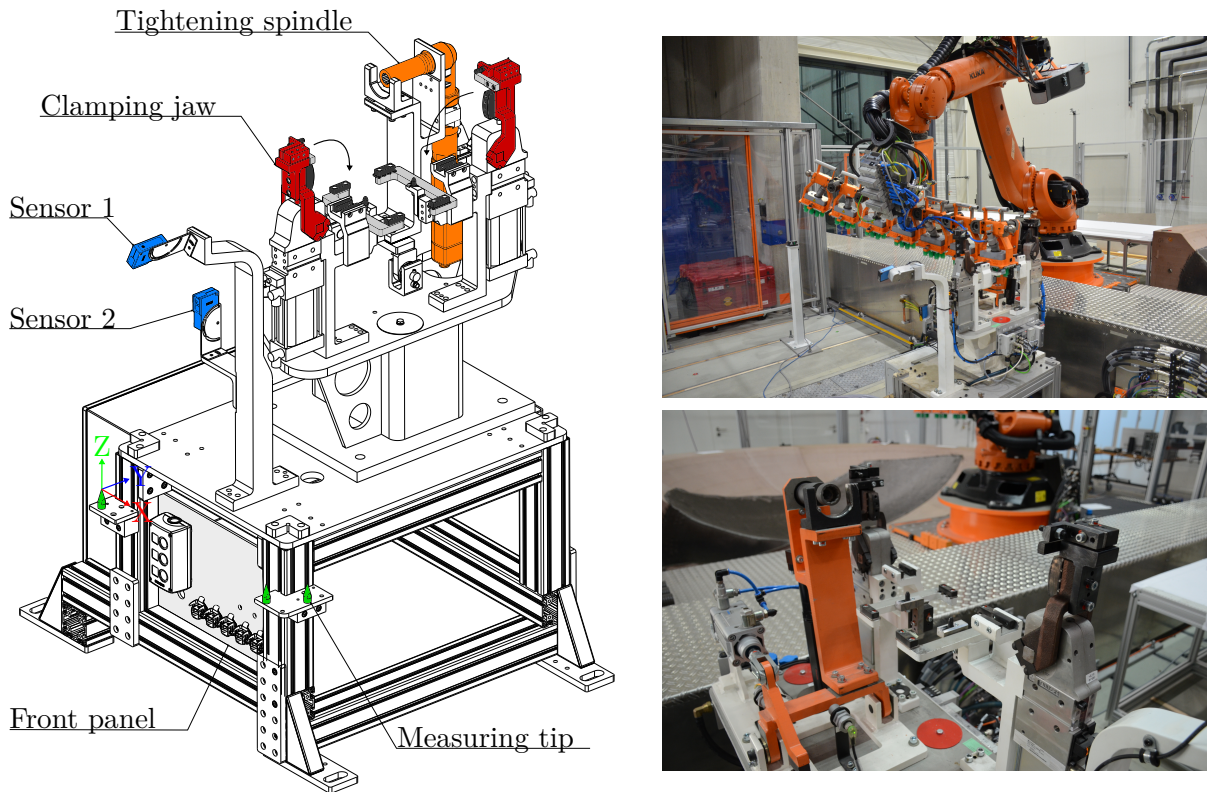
CAD drawing of adjusting station with highlighted essential components (left), robotic end-effector position during adjusting process (top right), close-up of clamping position and support surface (bottom right).
